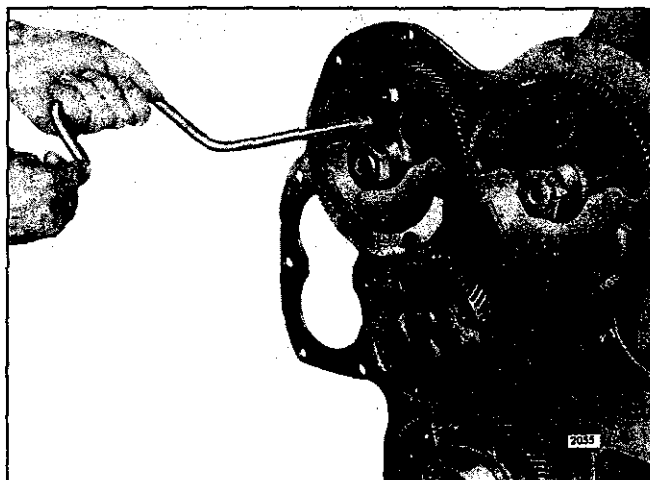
Removing or Installing Thrust Washer Retaining Bolts
